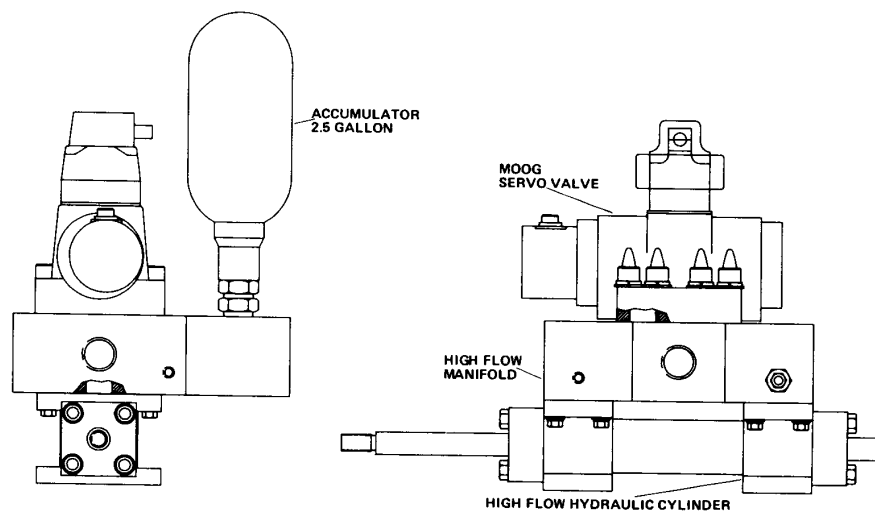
Details of the Hydraulic Manifold Sub-assembly.
